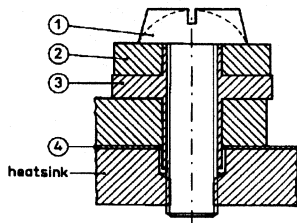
Insulated screw mounting with rectangular washer into tapped heatsink.
